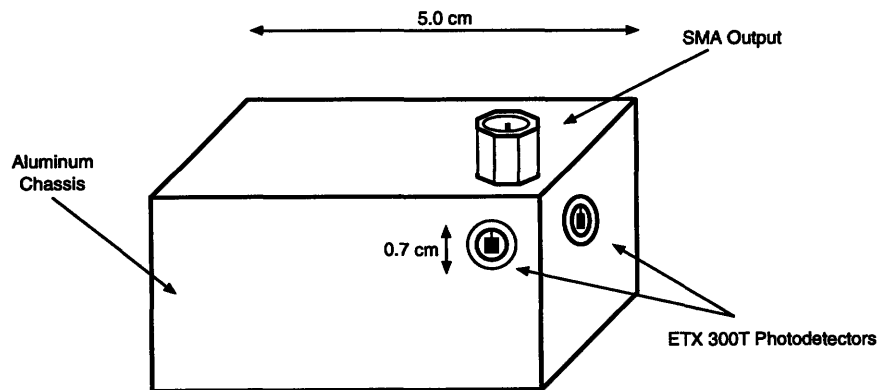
Drawing of dual-detector balanced receiver assembly.
